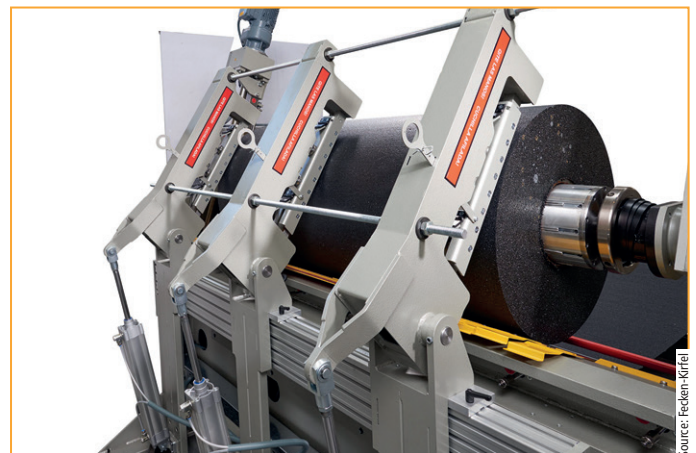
R 24 bandknife peeling machine – the peeled material sheet is continuously rolled.
